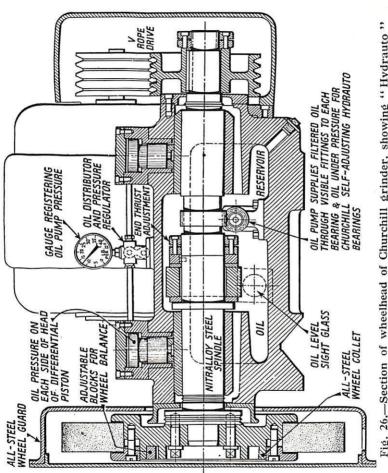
Section of wheelhead of Churchill grinder, showing "Hydrauto" self-adjusting bearings
